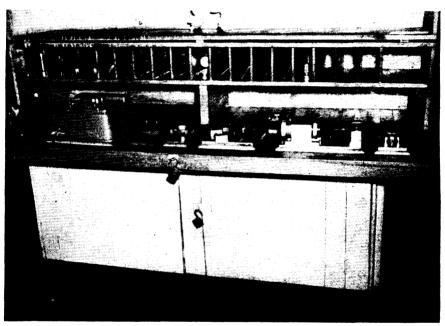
Special inspection bench for checking various dimensions of one high-production casting. Custom-built gages for intricate parts produced in large numbers are not unusual.
